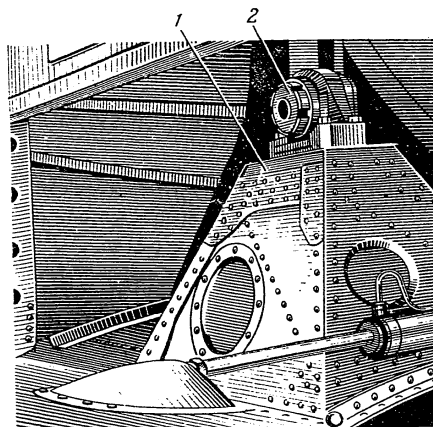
REAR ZONE ENGINE ATTACHMENT UNIT
